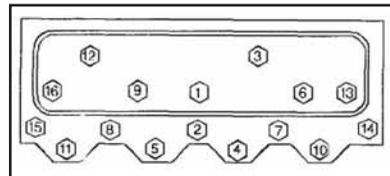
Cylinder head bolt torque sequence for GM 7.4L engines.
